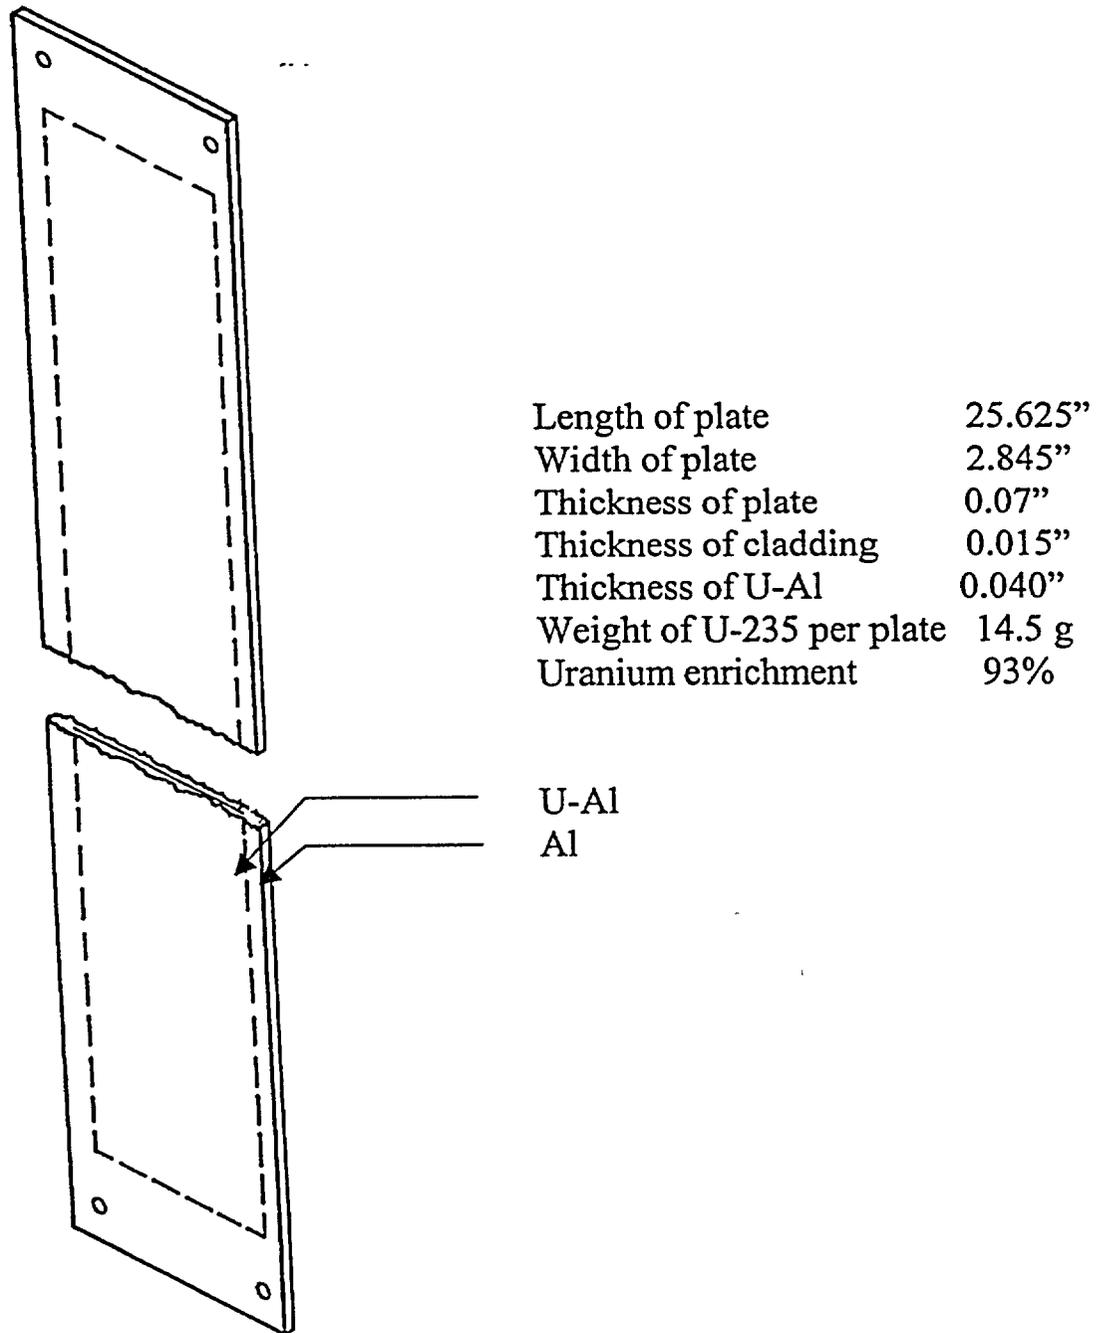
Schematic showing UFTR HEU Fuel Plate Geometry
